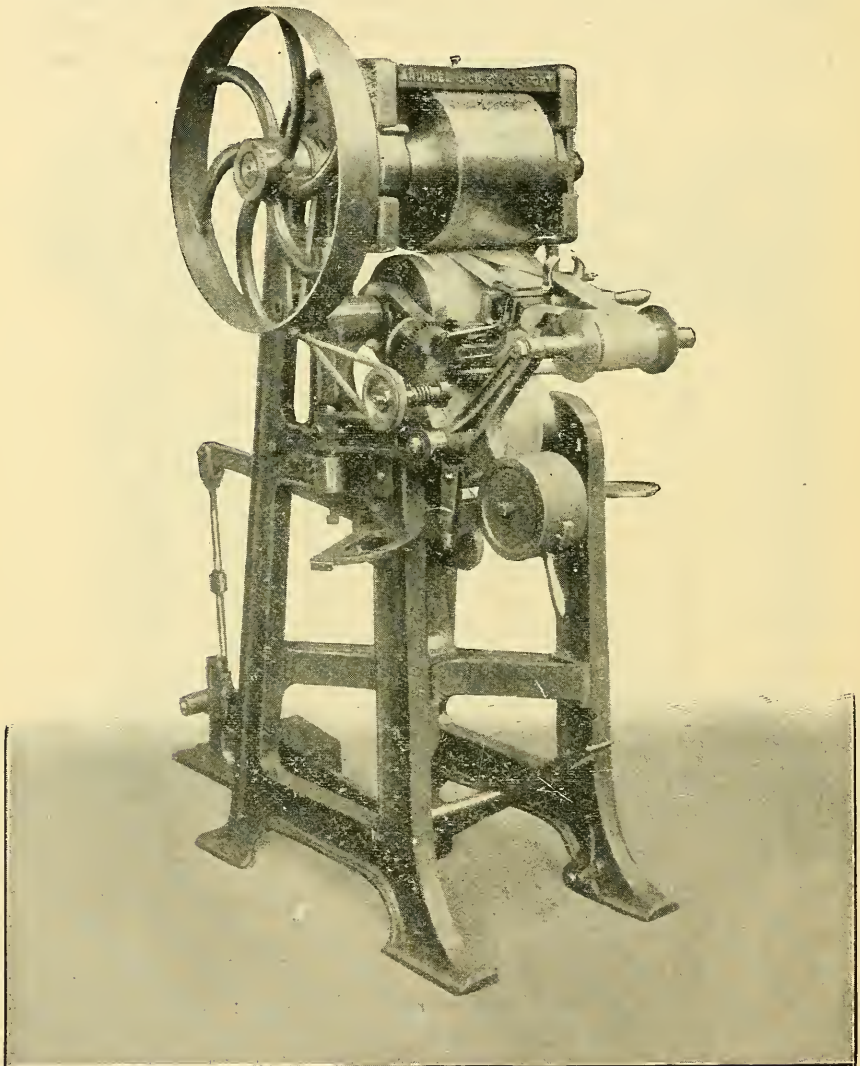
Improved yarn preparing machine. (Made by Messrs Arundel & Co., Stockport.)
